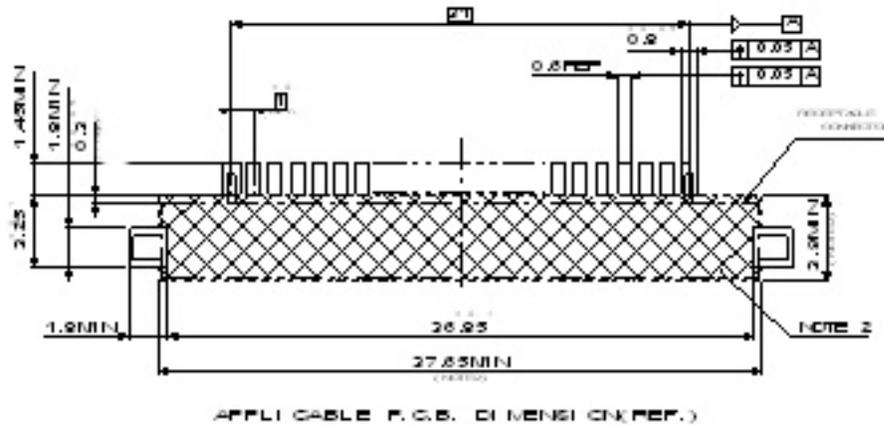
PCB Mount Connector Recommended Footprint Layout (in unit of mm)
